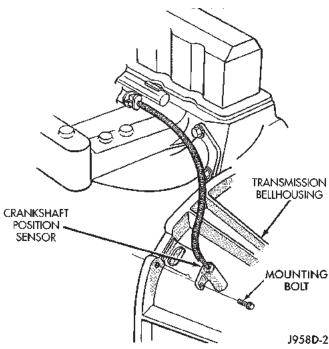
Crankshaft Position Sensor—4.0L Engine
